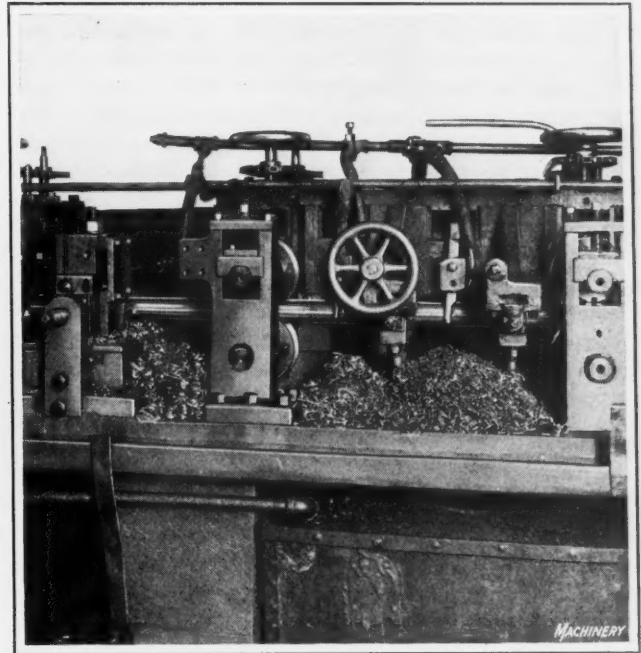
Machine for finishing the Surface of the Welded Seam
